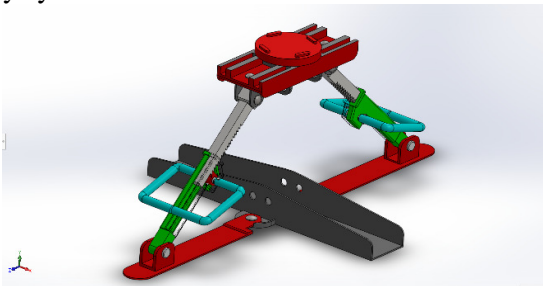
Assembled view of safety system using automatic reverse locking rack mechanism for car jack
